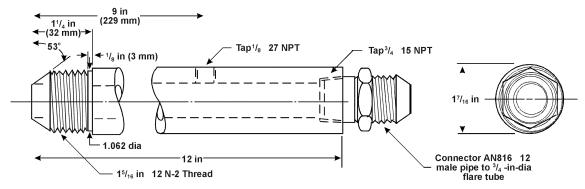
Btu Heat Transfer Device—Inlet Tube
